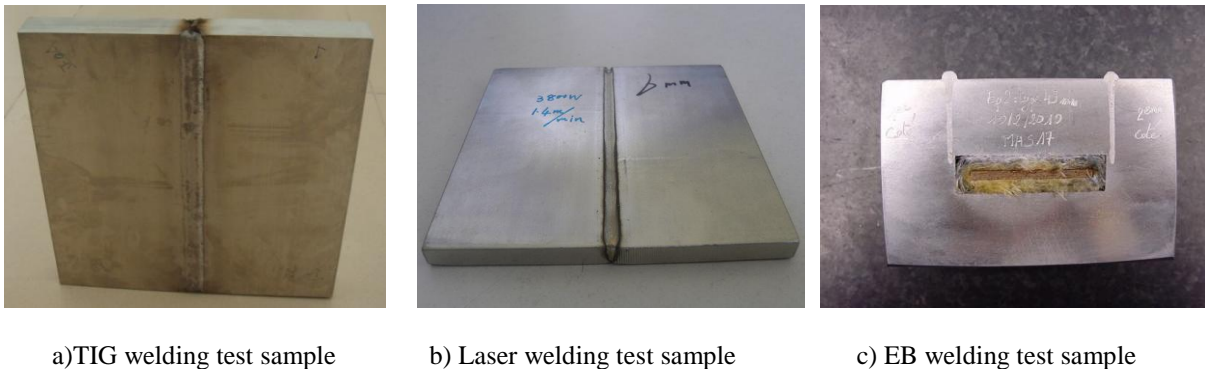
Test samples for TIG, laser and Electron Beam welding
